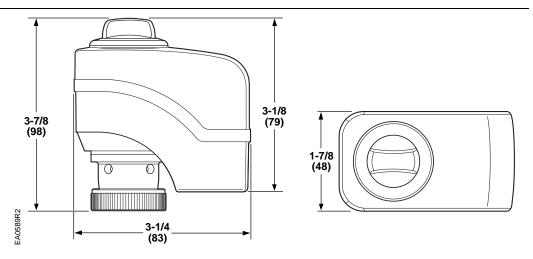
Dimensions of the SSB Actuator. Dimensions Shown in Inches (Millimeters).
